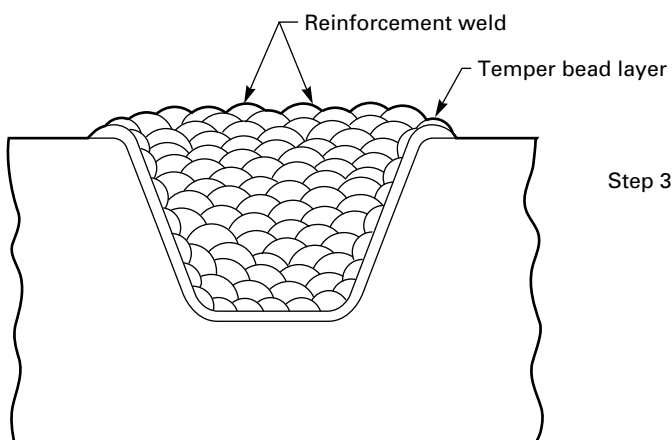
TEMPER BEAD WELDING AND WELD TEMPER BEAD REINFORCEMENT
